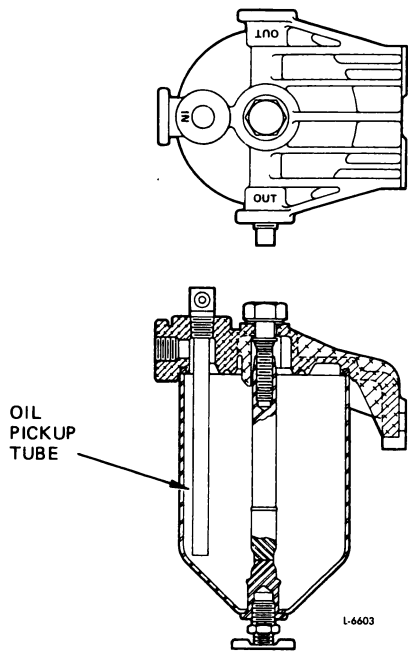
Oil Reservoir Assembly with Pick-up Tube
